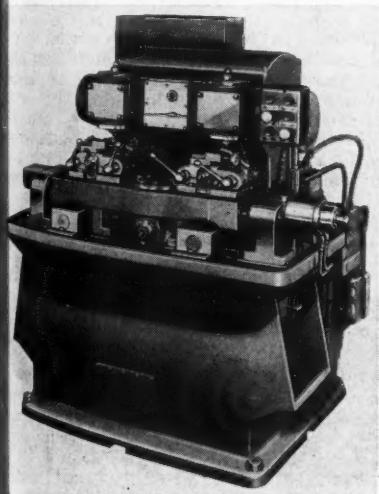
View of Hanchett Traveling Wheel Grinder Showing Segmental Grinding Wheel and Controls
